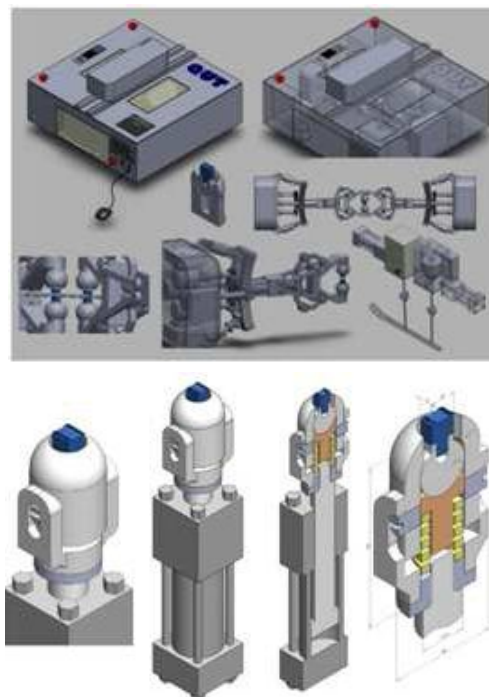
Conceptual design of a CNC machine for deforming orthopaedic bone plates which uses spring power for clamping and threads for holding the plate during process
